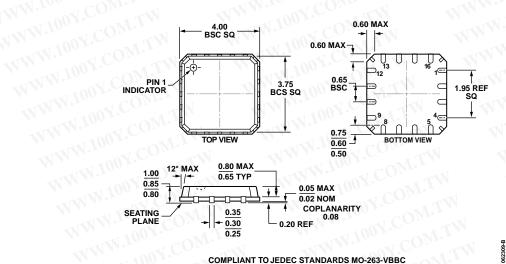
16-Lead Lead Frame Chip Scale Package [LFCSP_VQ] 4 mm × 4 mm Body, Very Thin Quad, with Hidden Paddle CP-16-19 Dimensions shown in millimeters
